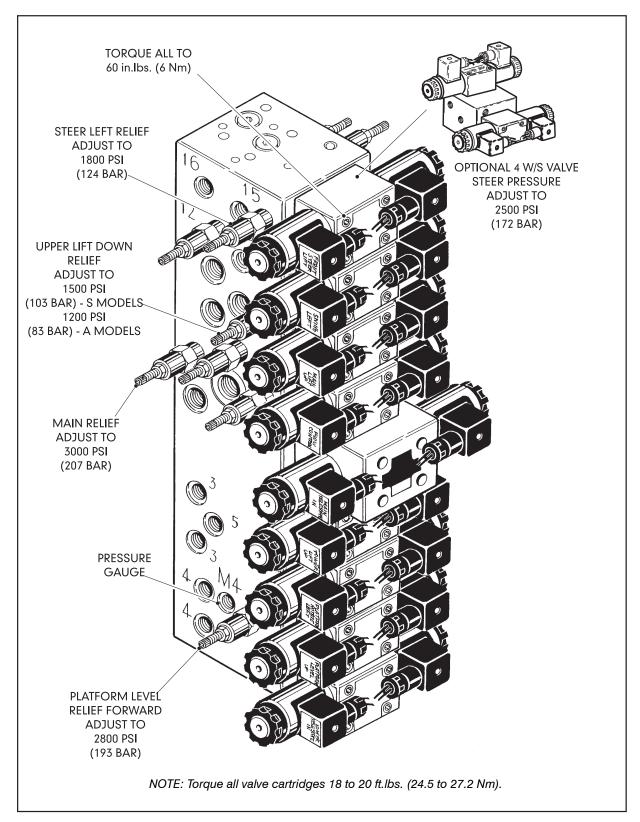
Main Control Valve Pressure Adjustments - Sheet 1 of 2
